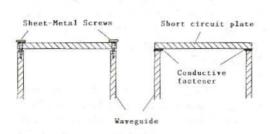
Alternative possibilities for fastening the short circuit plates with screws or conductive fasteners
